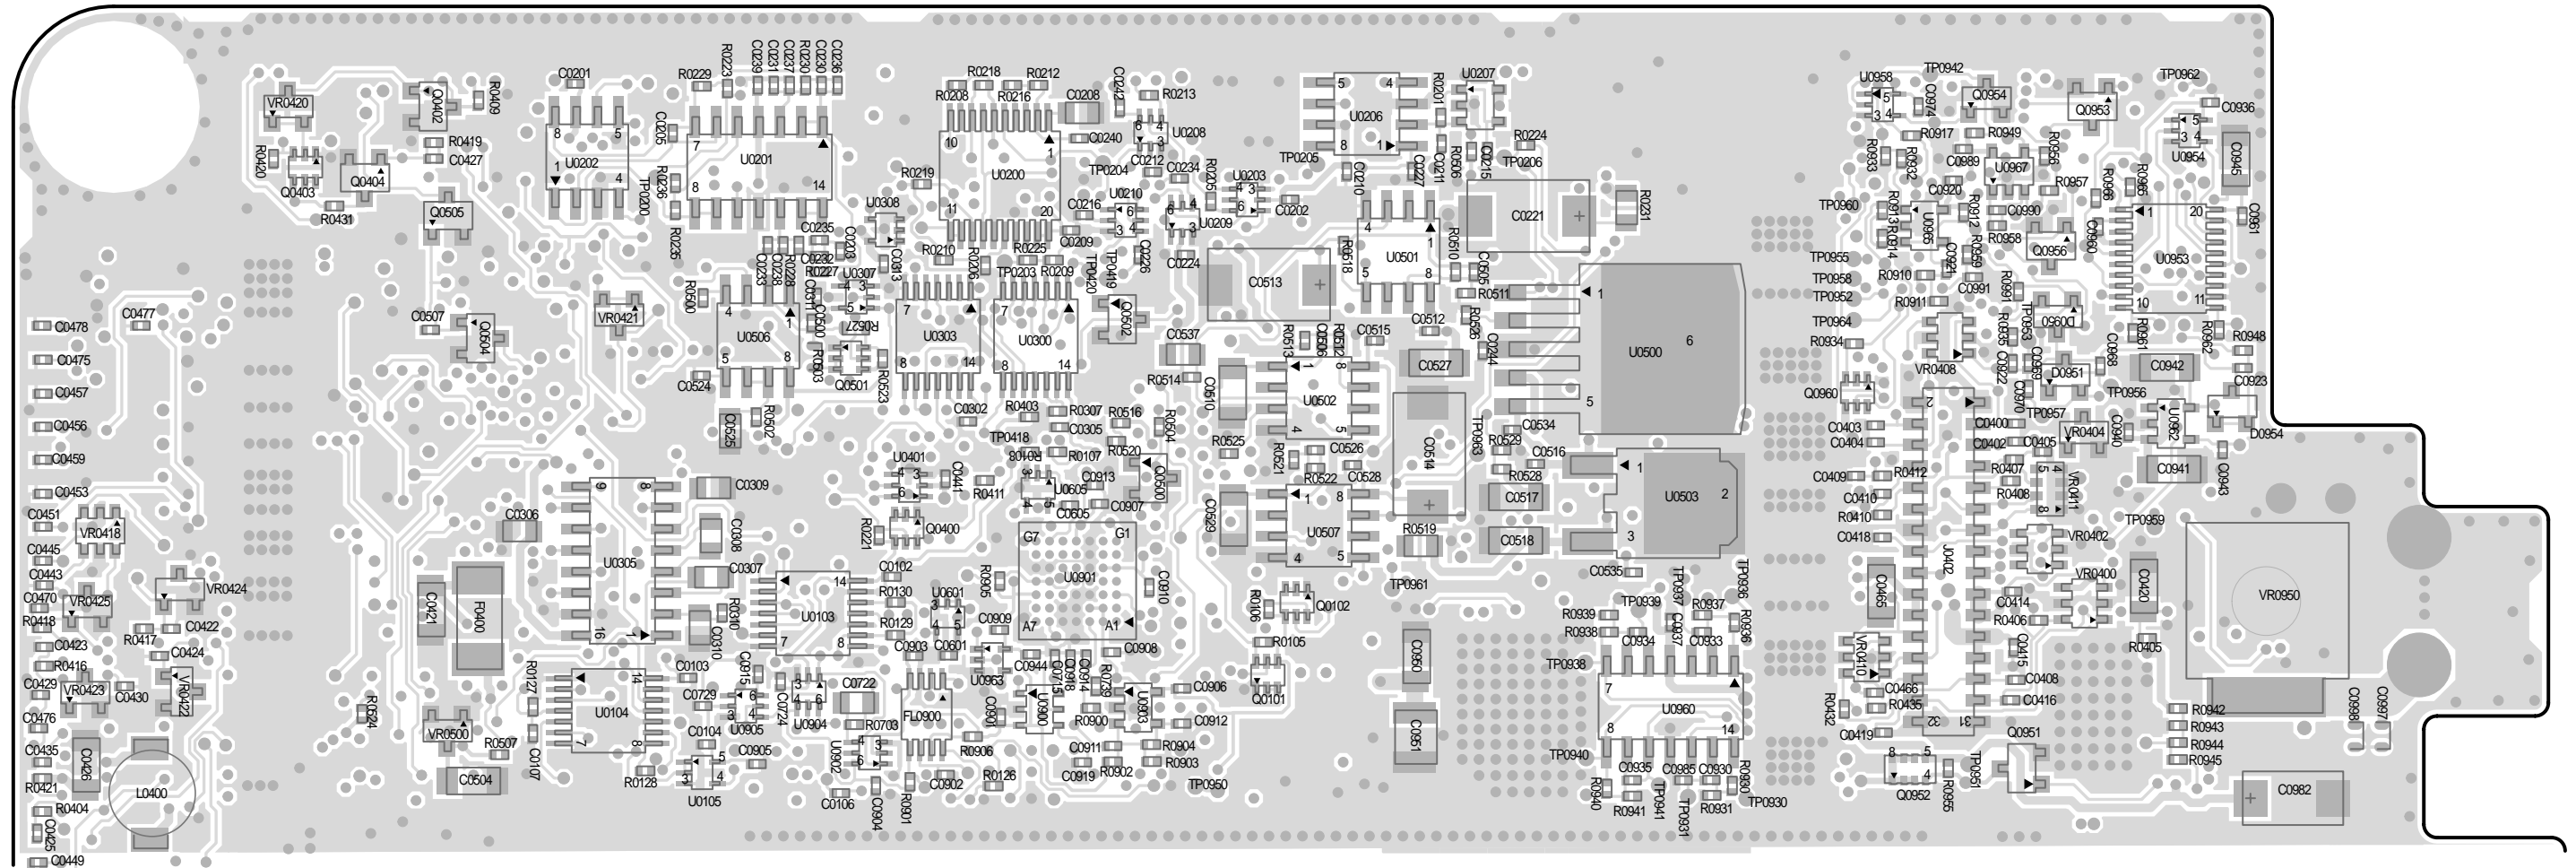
HUE4040A Main Board Layout—Side 2 Top
